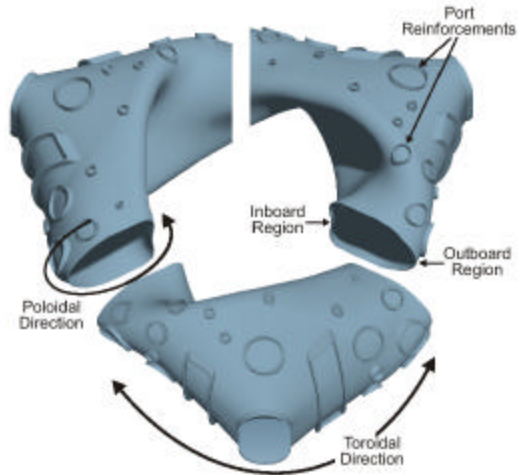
NCSX vacuum vessel sub-assemblies (partially fabricated)
